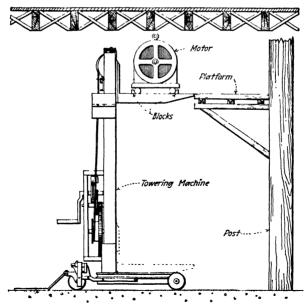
Lifting a motor onto a column support with a tiering machine. (REVOLVATOR Co., Jersey City, N. J.)
